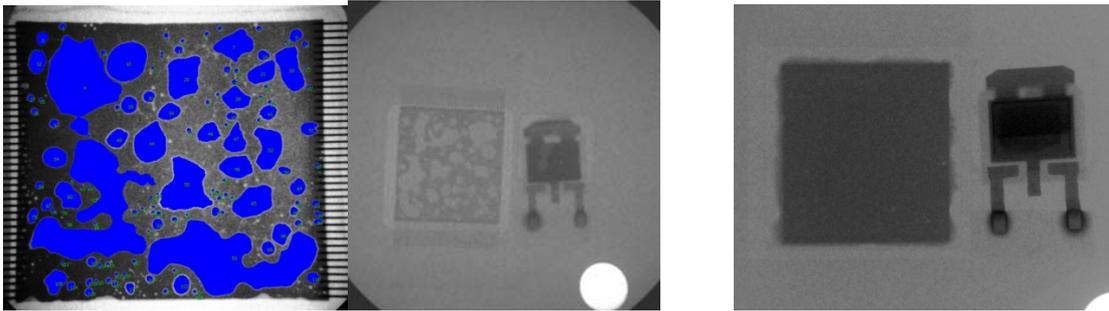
To the left and middle solder without vacuum. To the right, solder using the new oven
